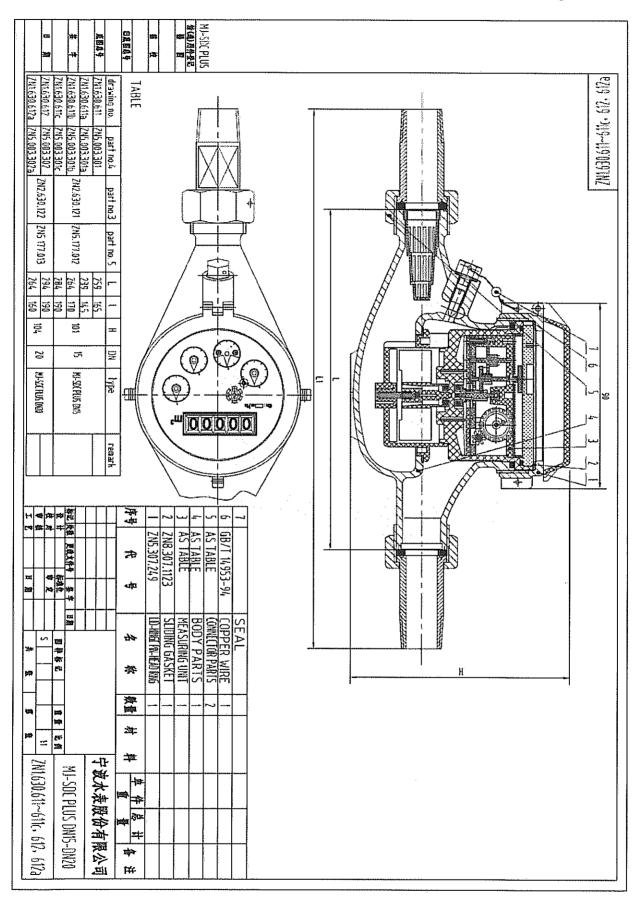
The water meter type MJ-SDC PLUS with magnetic pointer and impulse transmitter - assembly drawings:
